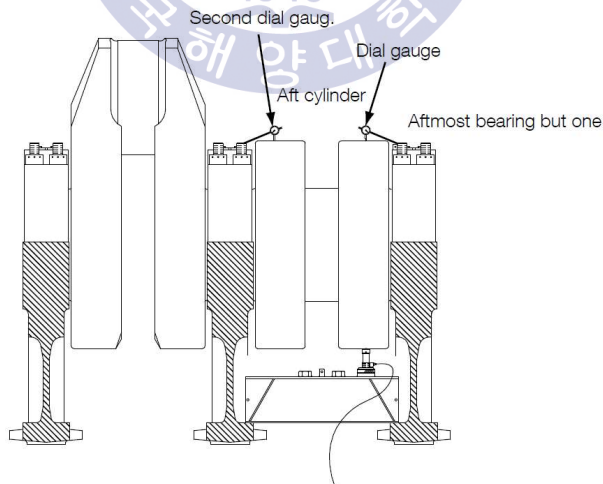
Jack-up of main bearing except the aftmost main bearing
